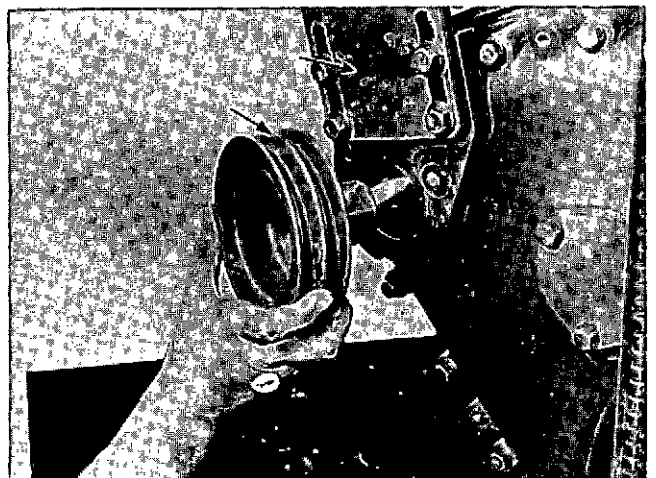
, V414153. Install auxiliary drive pulley
